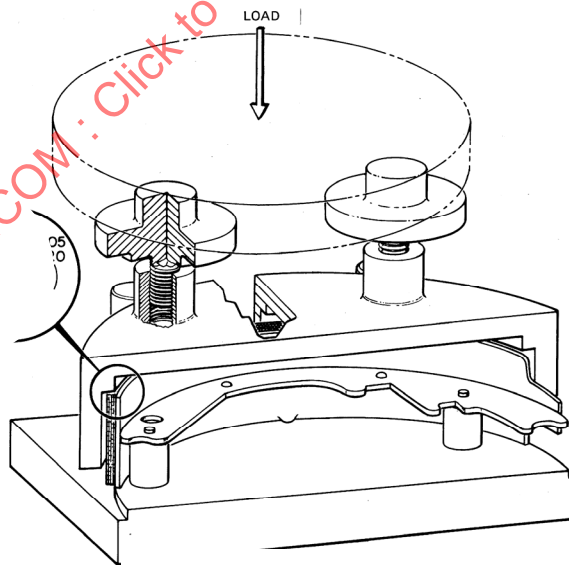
BOND PLANE SHEAR TEST - DRUM BRAKE
